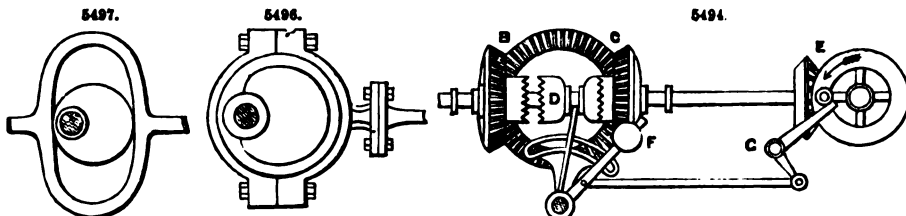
An eccentric generally used on the crank-shaft for communicating the reciprocating rectilinear motion to the valves of steam-engines, and sometimes used for pumping.
